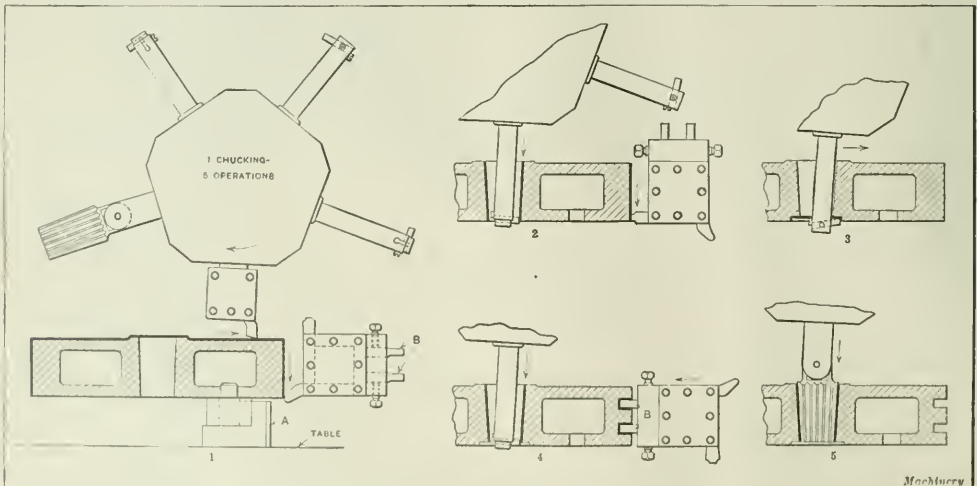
Tooling Lay-out for a Locomotive Piston-head
